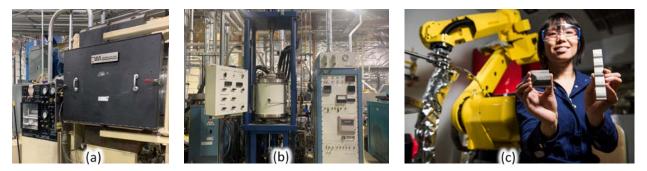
PNNL equipment for coupon fabrication in FY 2020: (a) super plastic forming machine; (b) vacuum hot press; and (c) high-pressure cold spray robotic system
